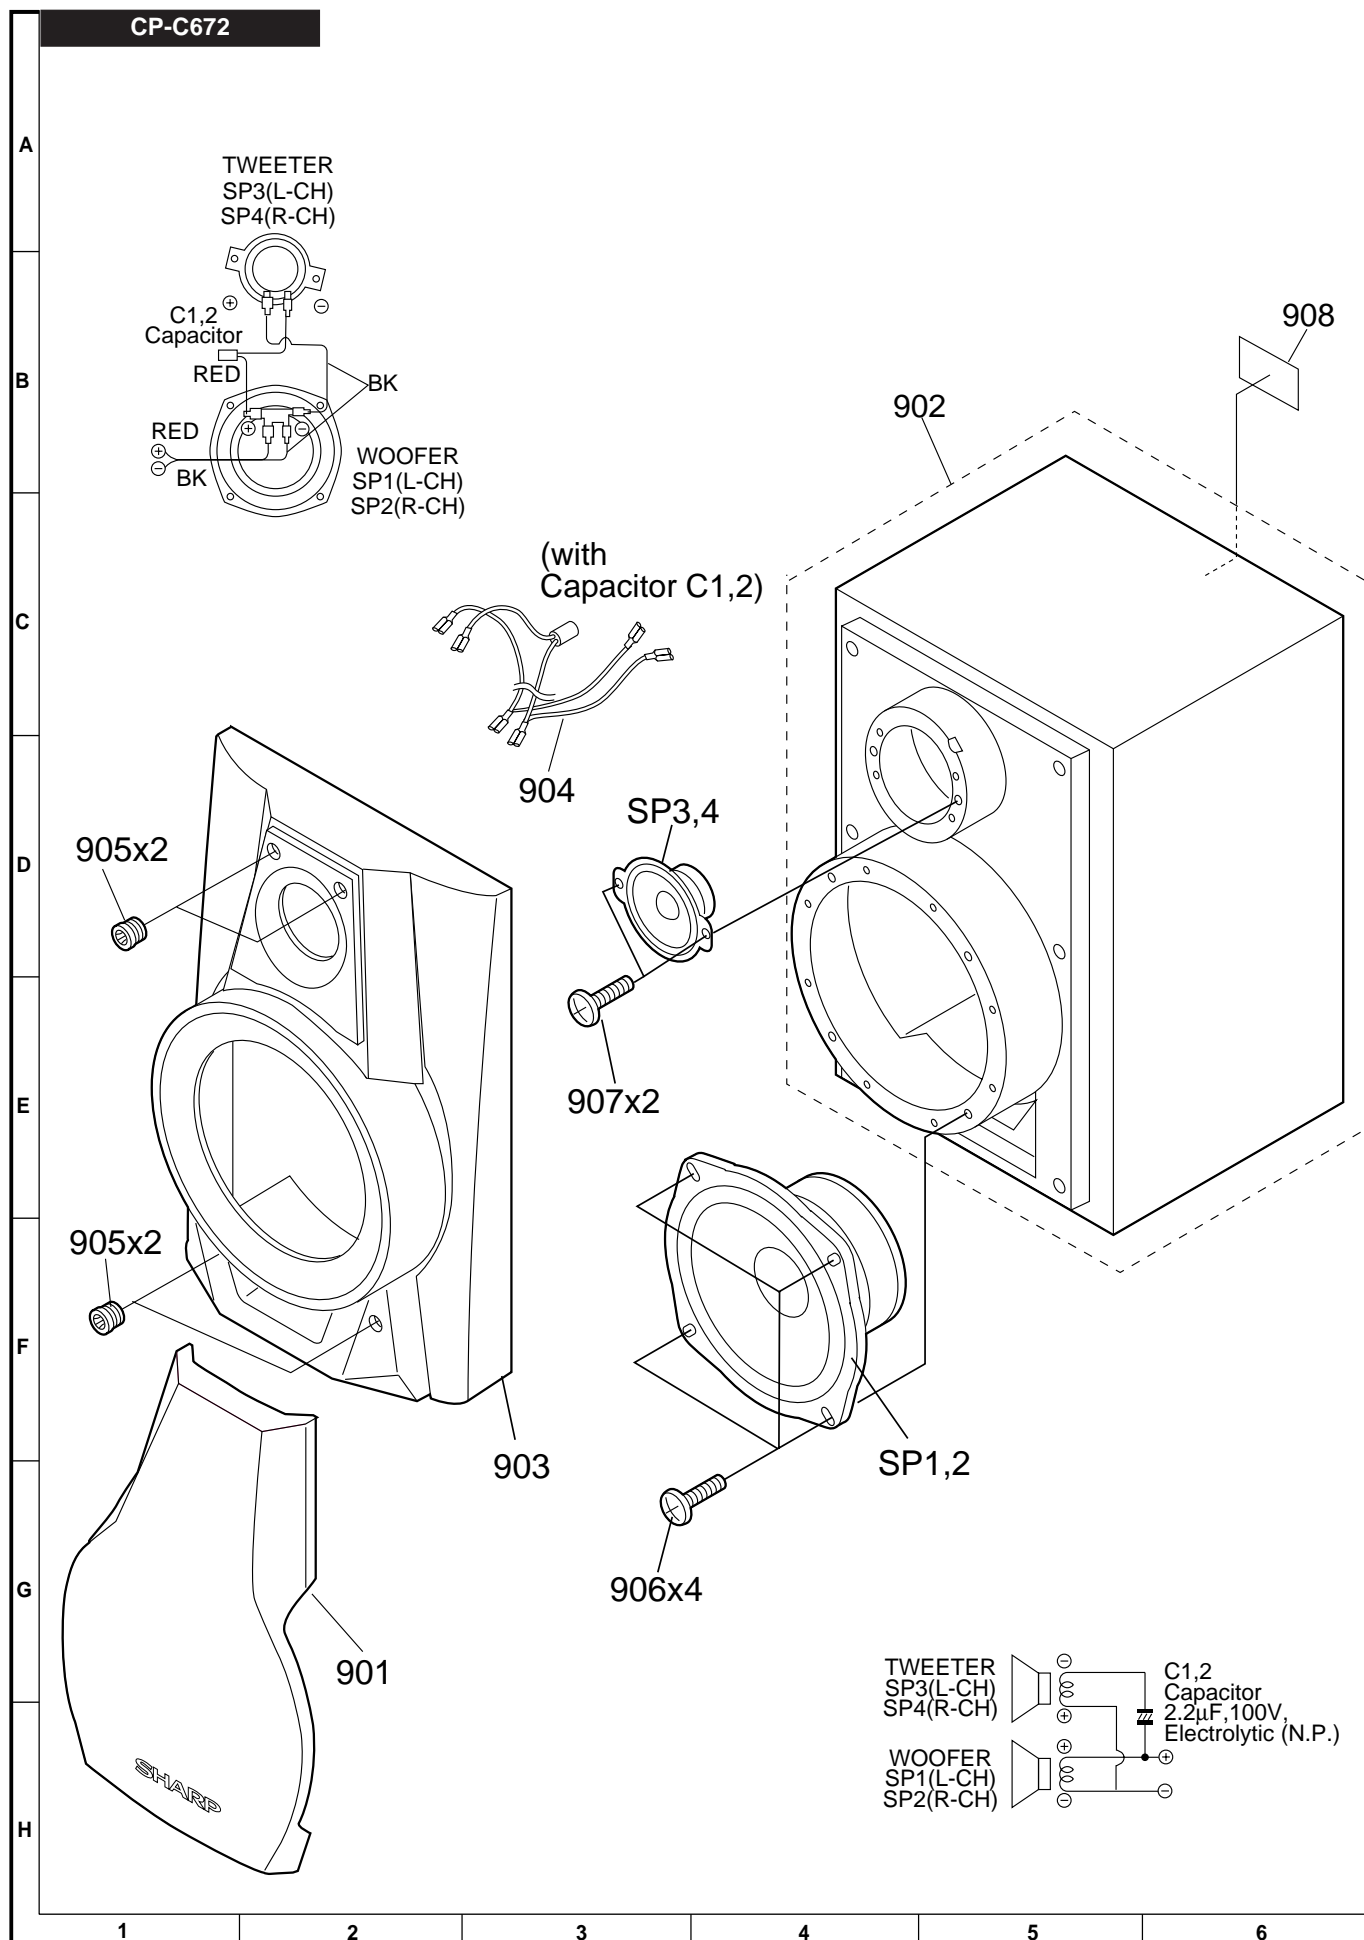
SPEAKER EXPLODED VIEW (1/3)
